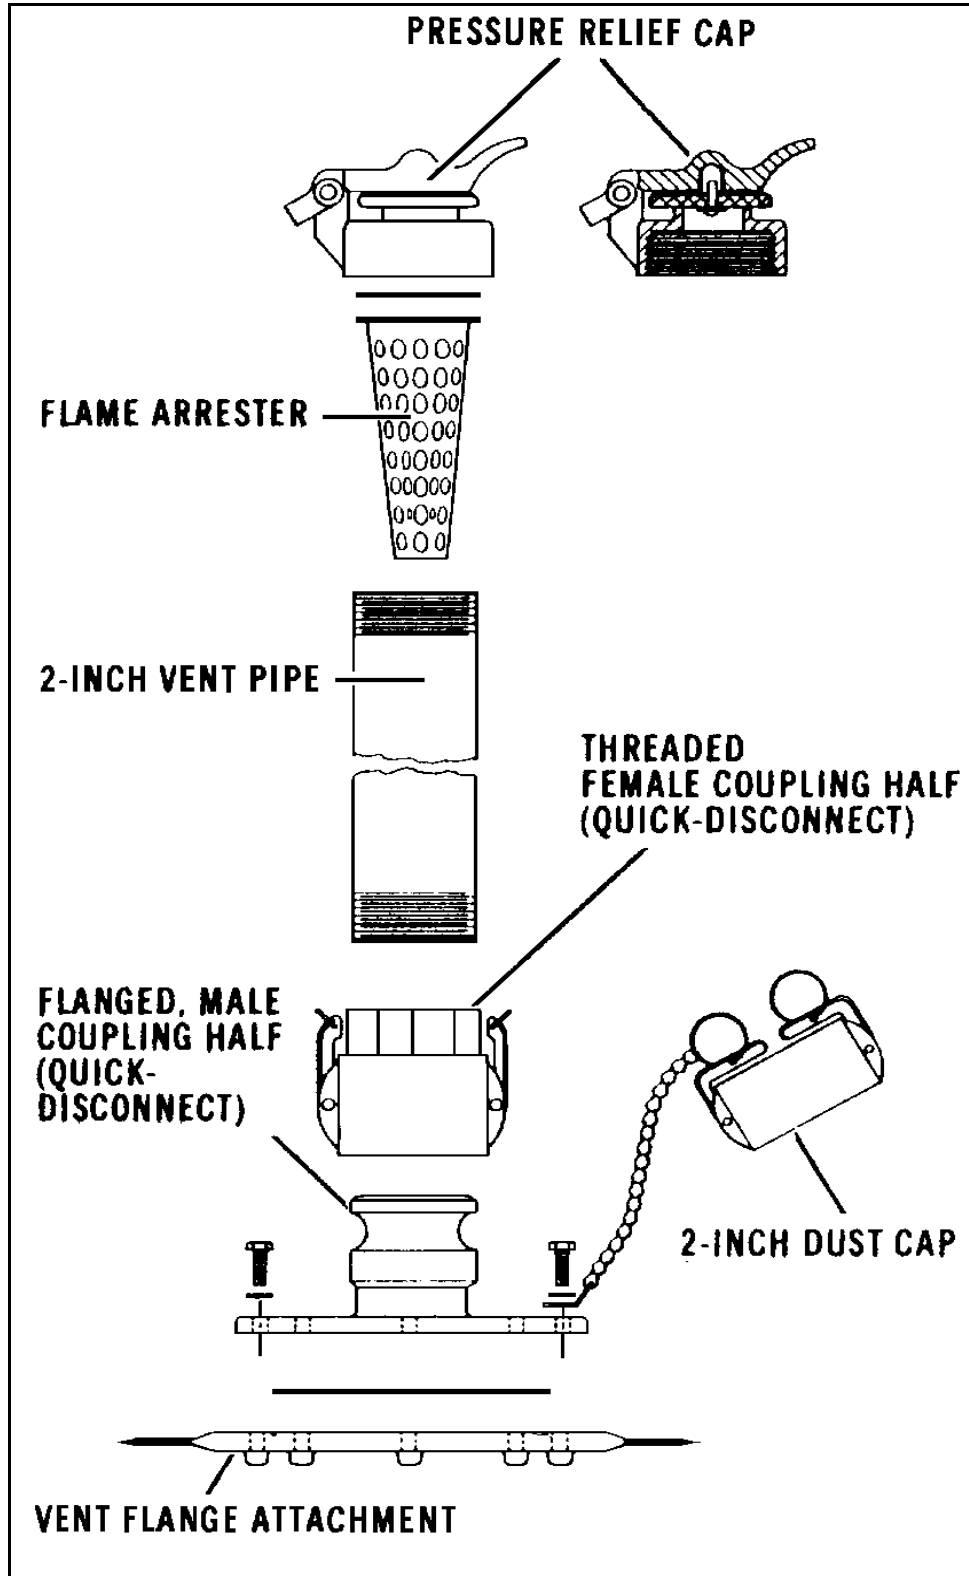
Vent fitting assembly (same for all collapsible tanks)
